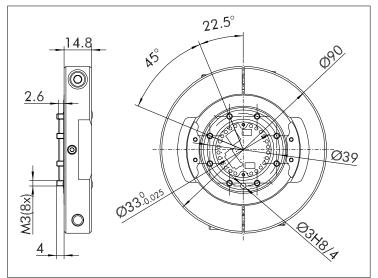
Dimensions of Flat tool change system head FWK (connection robot side)
